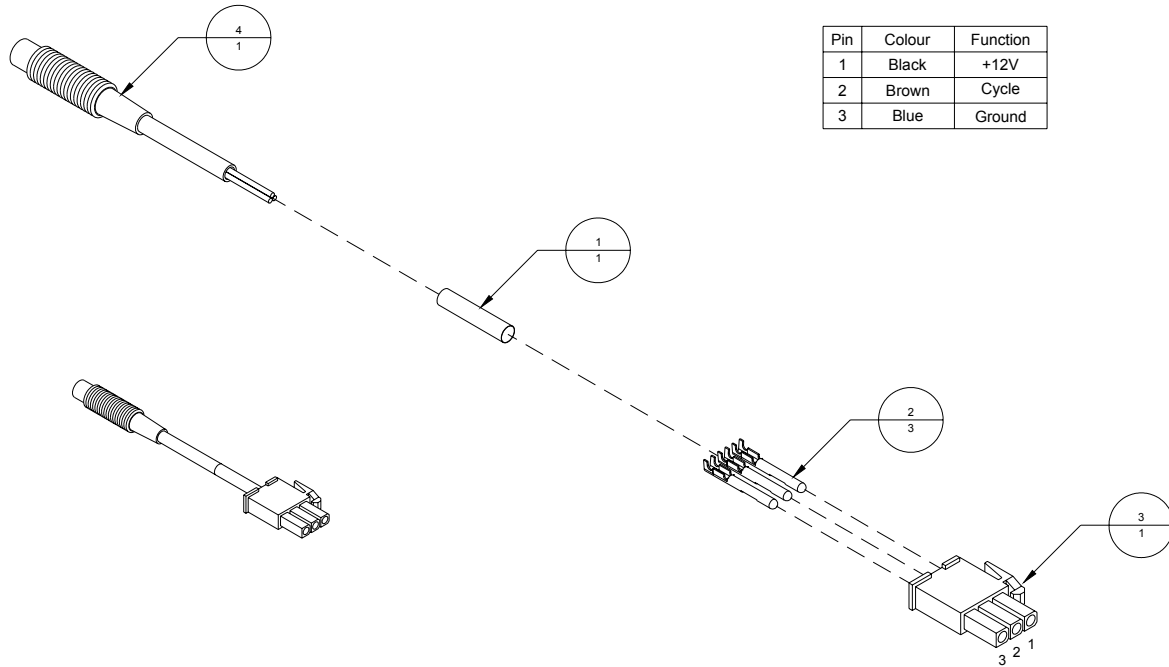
Cycle Proximity Switch Assembly (630004A)
